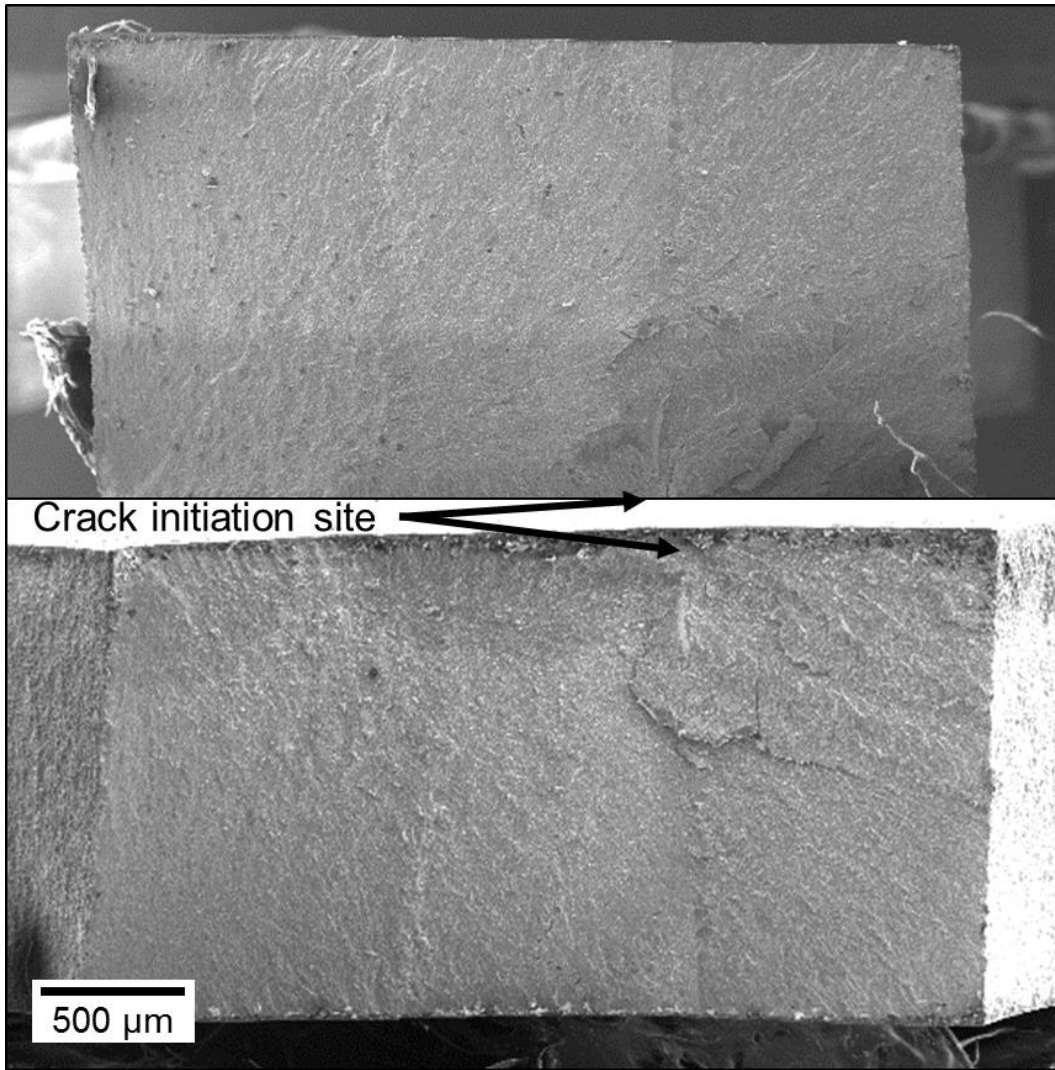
SEM of fracture surface of tensile dogbone tested at room temperature and 10^{-4} s^{-1} showing facing sides of fracture surface. Fracture initiates on sample face, and follows faceted path. (Courtesy of author)
